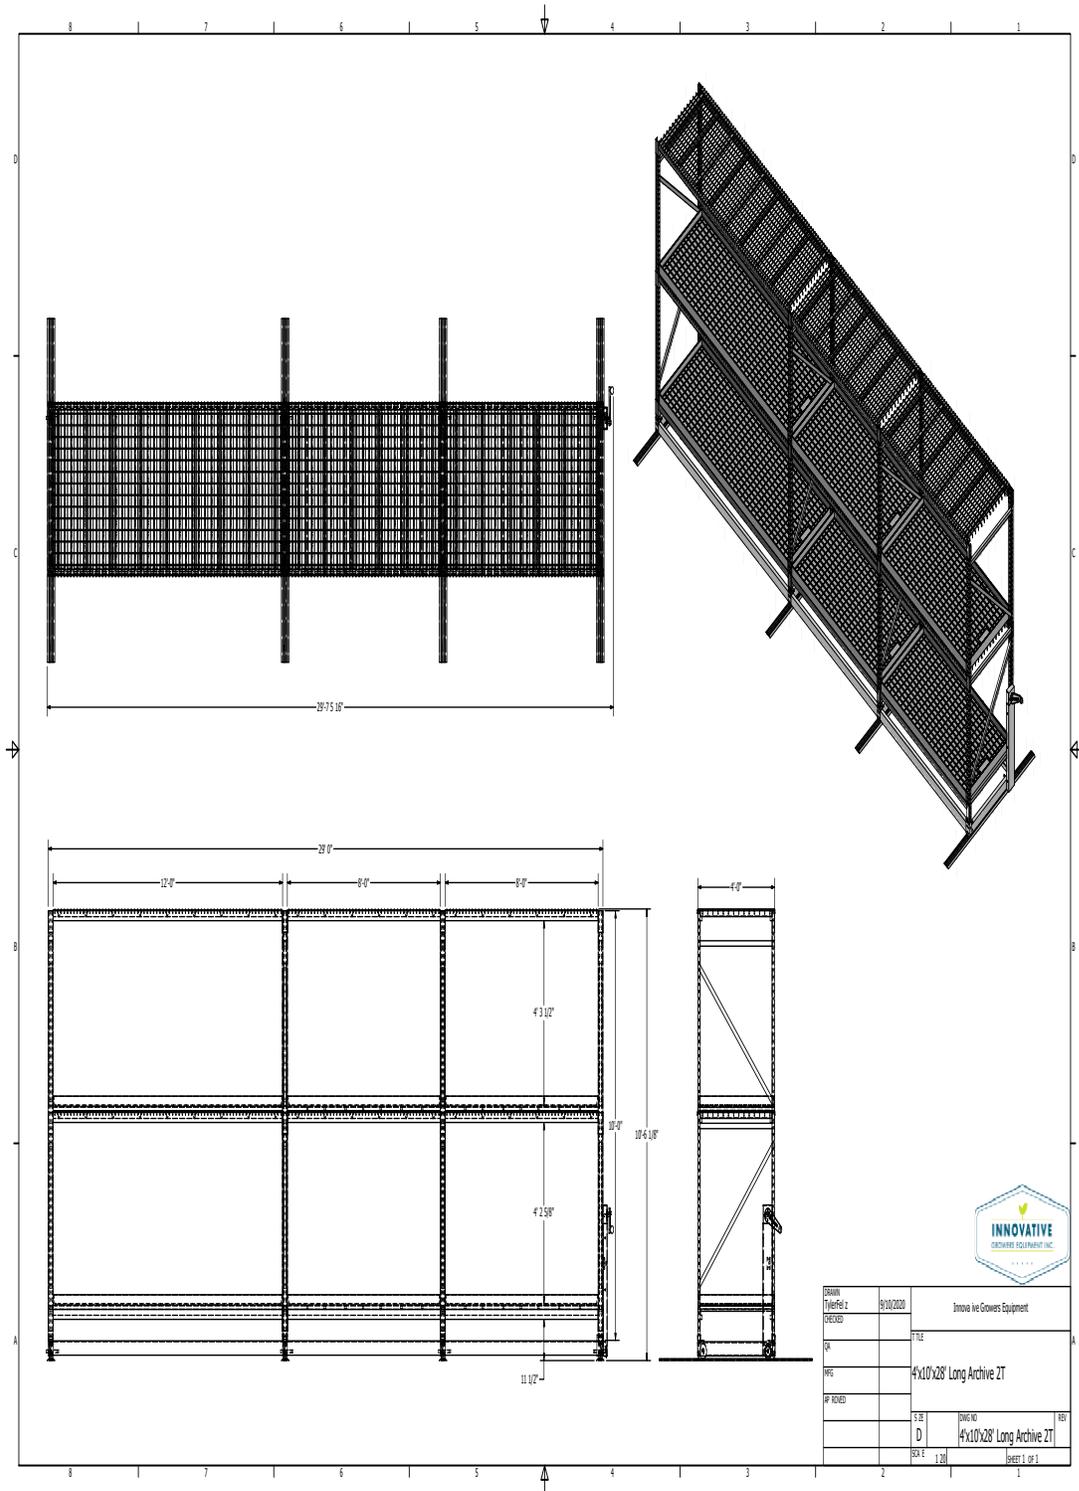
Engineering Plans and Specifications (Cultivation Facilities).
